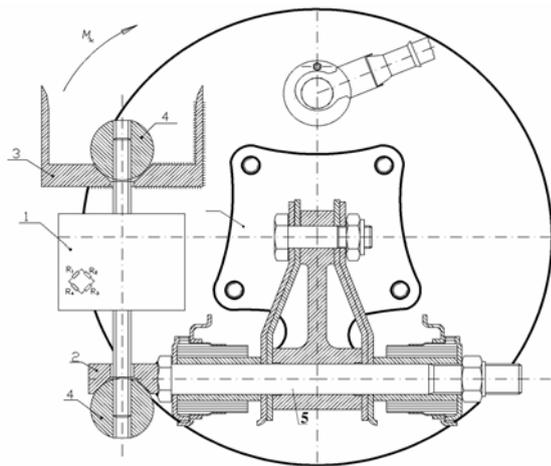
Design solutions of brake torque transducers indirectly, through force transducer
